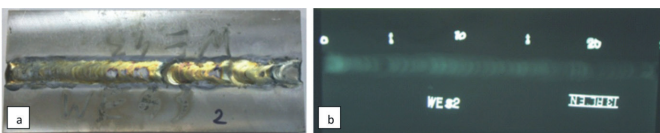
Welded joint of the WE43 cast magnesium alloy: a) welded test plate, b) X-ray photograph of the plate used for tensile tests
